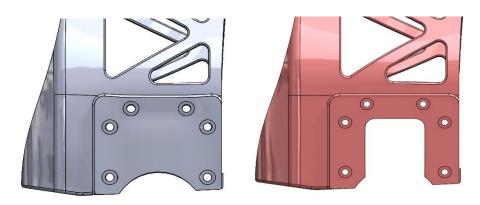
Previous thigh design (left) and new design (right) with cutout for motor wire access
